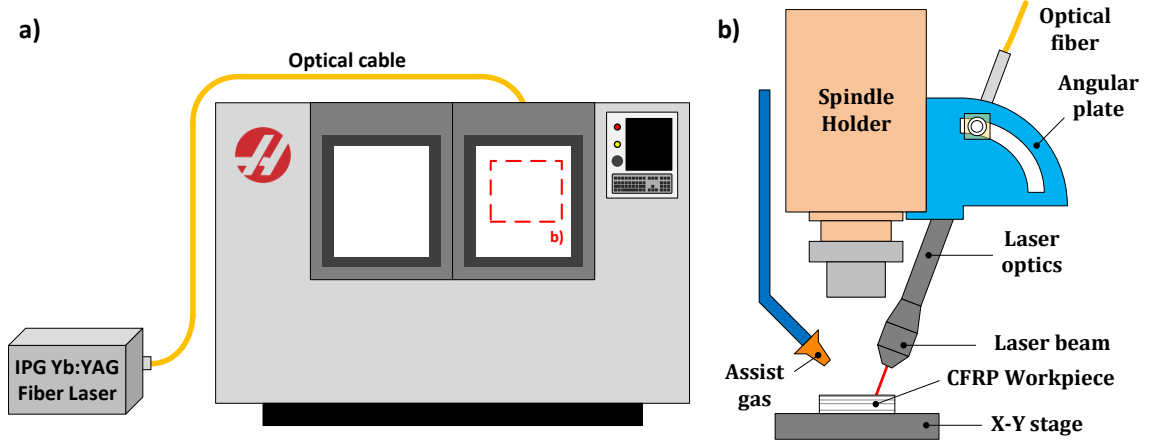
Diagram of Yb:YAG fiber laser setup for CFRP laser machining experiments: (a) laser fiber optic cable allows for remote operation; (b) adjustable fiber delivery head mounted to CNC mill spindle holder..
